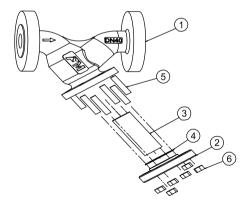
Exploded view of Forbes Marshall Cast Strainer [FMSTR54]
